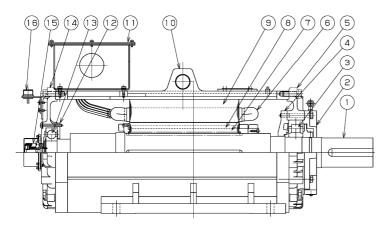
Structural sectioned drawing of EDM27*W to EDM3541W
